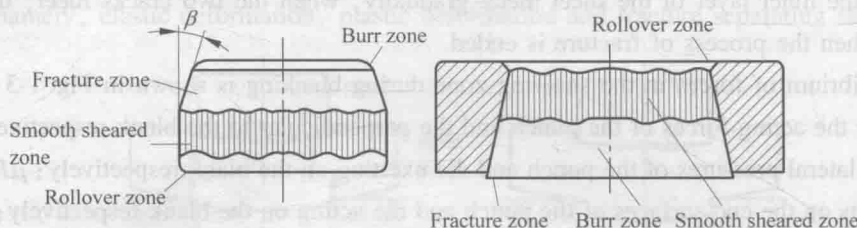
Characteristic of the cutting cross-section of blanking workpieces
